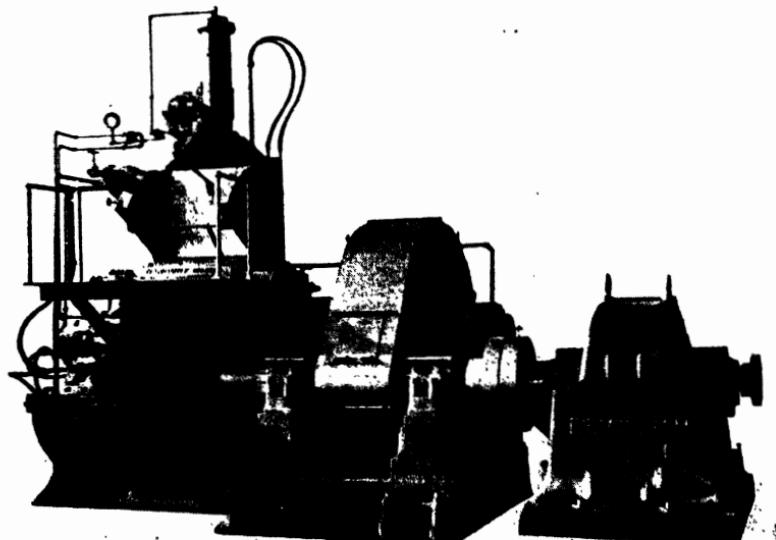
Rubber mixing mill employing, in part, the principle of gravity feed. (*Courtesy of the Farrell-Birmingham Company.*)
